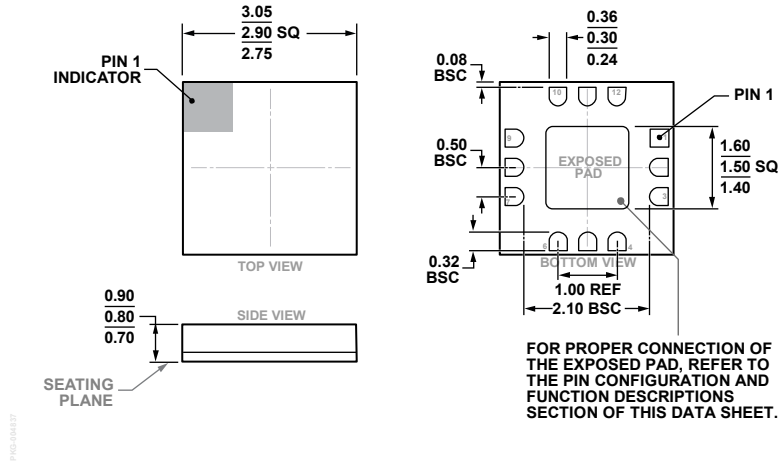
12-Terminal Ceramic Leadless Chip Carrier [LCC] (E-12-4)
